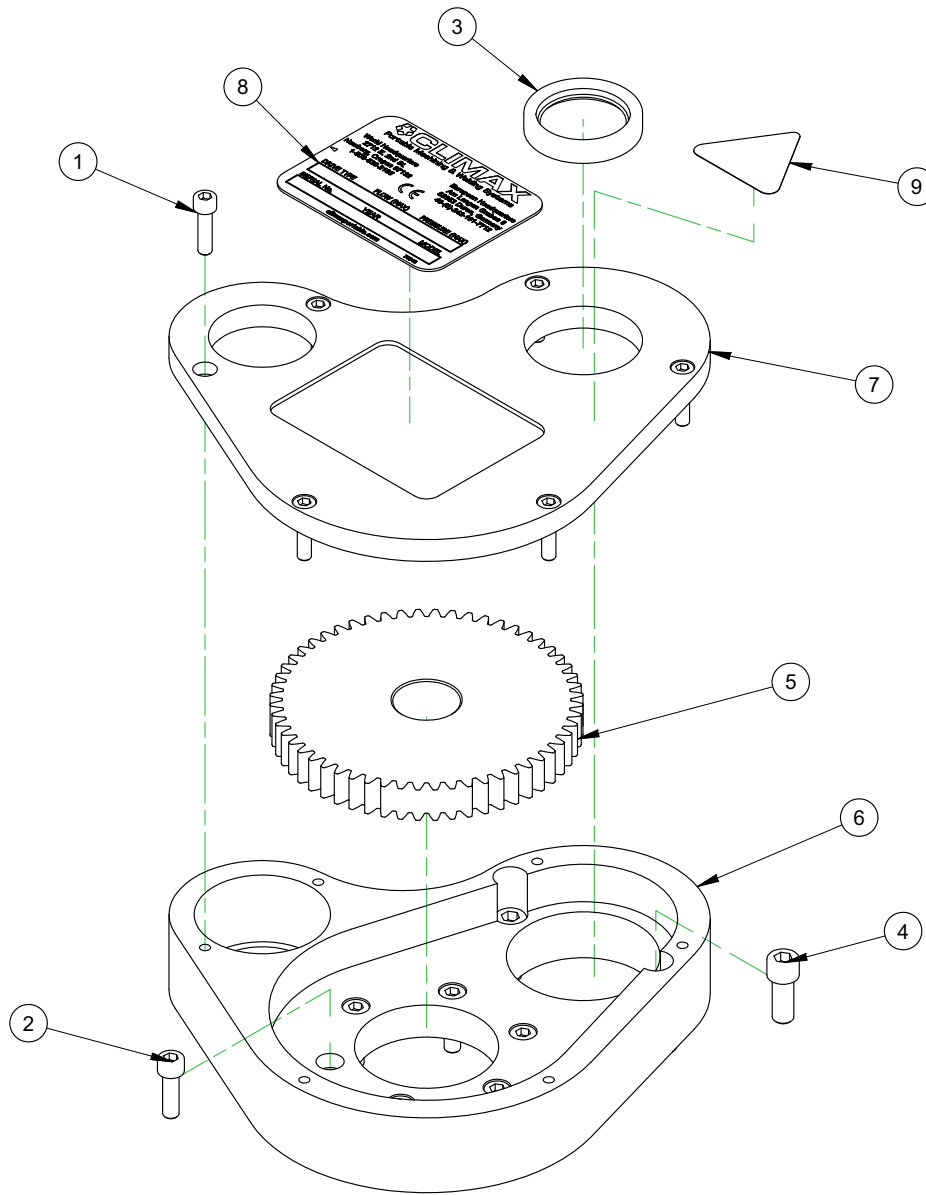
PNEUMATIC MOTOR ASSEMBLY (P/N 38708)
